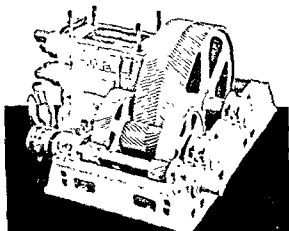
Helical gear speed reducer. (Farrel-Birmingham Co.)
